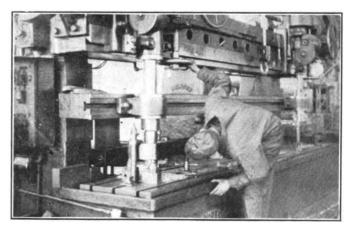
Adjusting the Cutter on a Modern Two-Spindle Rod Borer
